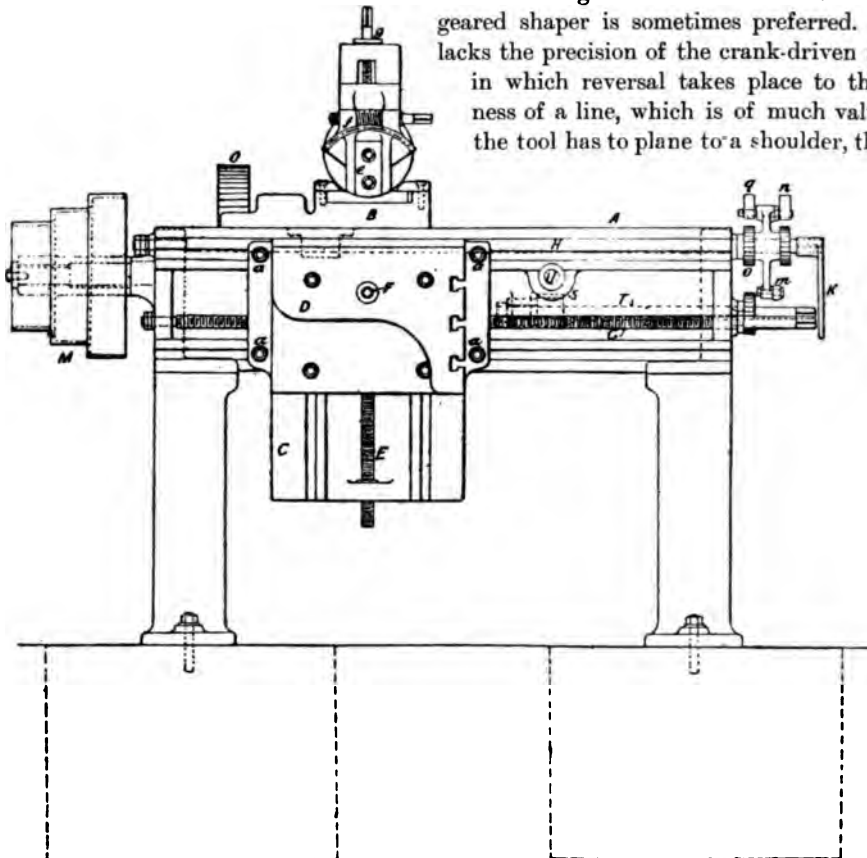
8-Inch Shaper. (Front Elevation.)
